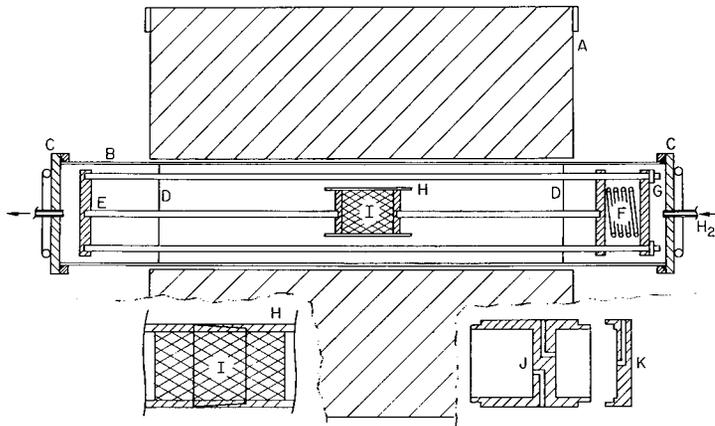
Arrangement used for the sintering of copper. The labeled parts are: A - Hoskins furnace, B - fused-quartz tube or other high temperature material, C - O-ring-sealed caps, D - stainless steel radiation shields, E - stainless steel "compactor," F - spring, G - adjustment nuts, H - copper tube, I - copper powder, J - body of heat exchanger, and K - cap for heat exchanger. Since the furnace is also used at temperatures above 1000°C, the end caps C are water cooled. A small flow of H<sub>2</sub> gas is maintained through the furnace while sintering, the flow rate being monitored by allowing the gas to bubble through water before venting. The enlarged insert at the lower left of the drawing indicates how the sintered piece is afterward machined to a taper (with a sharp lathe tool) prior to pressing it into the body of the heat exchanger, shown as an insert at the lower right.
